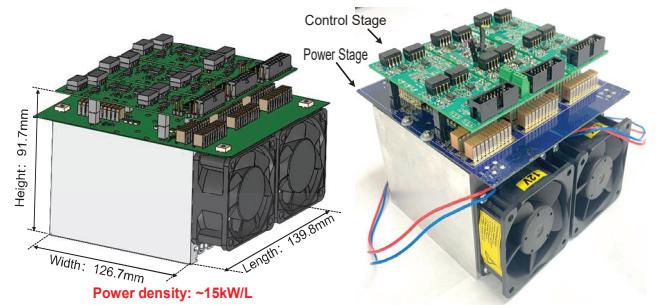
SOLIDWORKS inverter prototype and hardware prototype.
